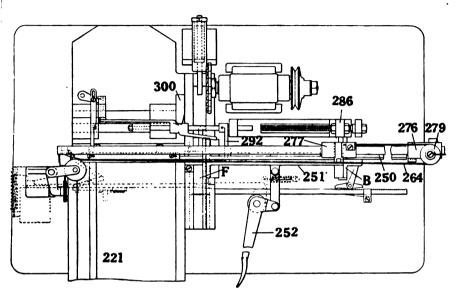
(Fig. 36 in patent abridgment.) Grant-Legros-Maw line-justifying machine. Side elevation.
